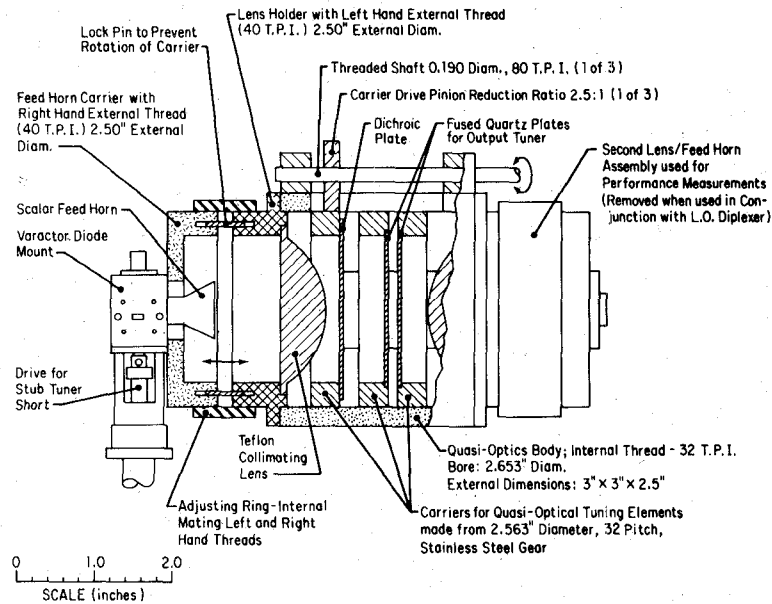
A schematic diagram of the assembled quasi-optical frequency tripler. The drawing is approximately to the scale indicated.
